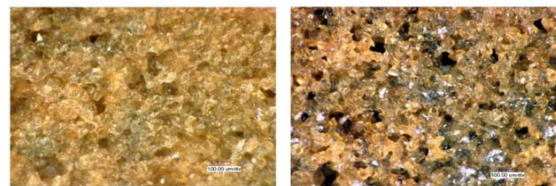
Illustration of the grinding wheel surface under a microscope at a 175x magnification. (Left): grinding wheel after dressing (Right): grinding wheel after  $V'_w = 9700 \text{ mm}^3/\text{mm}$ .
